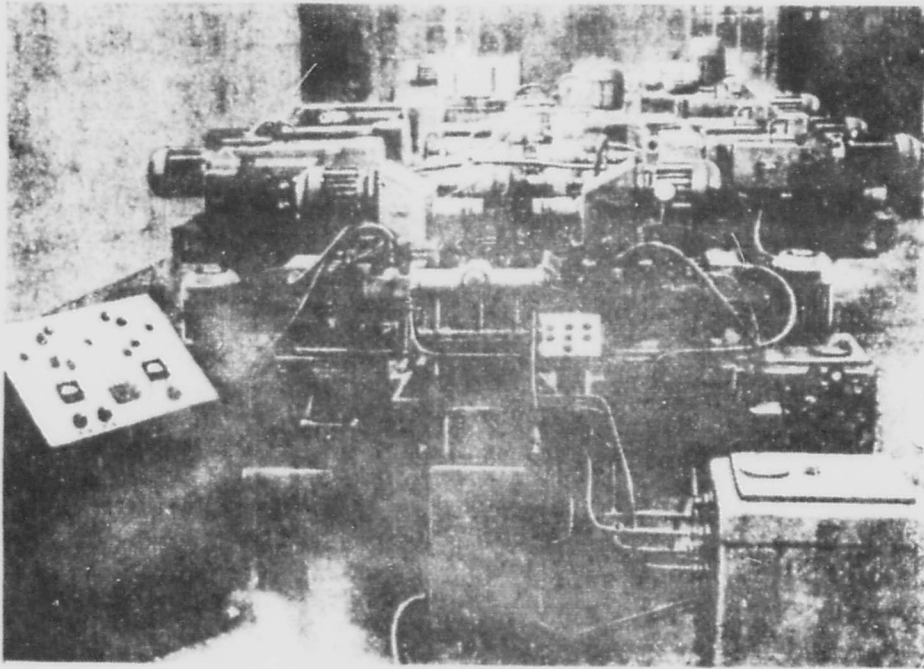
Transfer machine AL-2 for working journals and shelf of a compressor stator blade.
